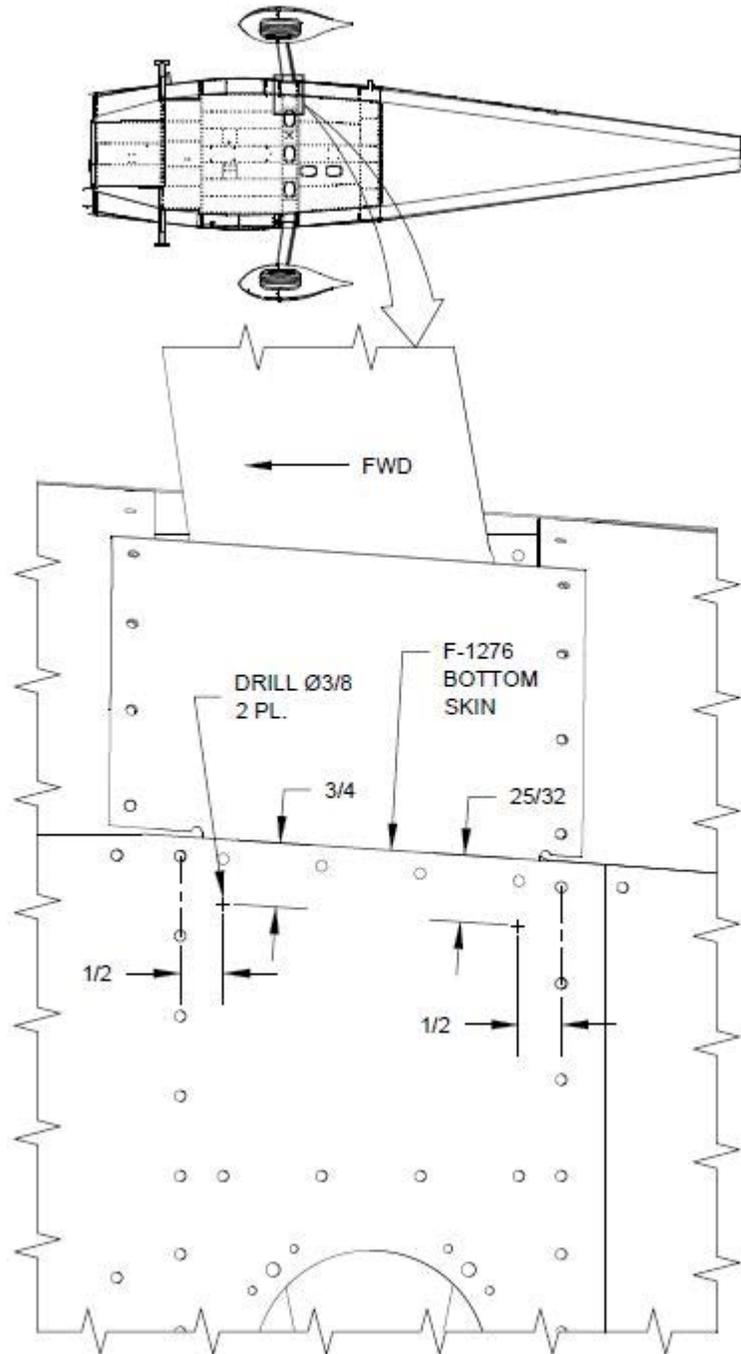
DRIFT AND SOCKET ACCESS HOLES (BOTTOM VIEW - LEFT SIDE)
